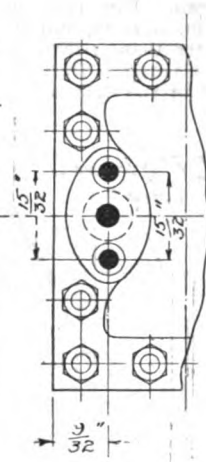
END VIEW H.-P. COVER, SHOWING STARTING VALVE GLAND.
